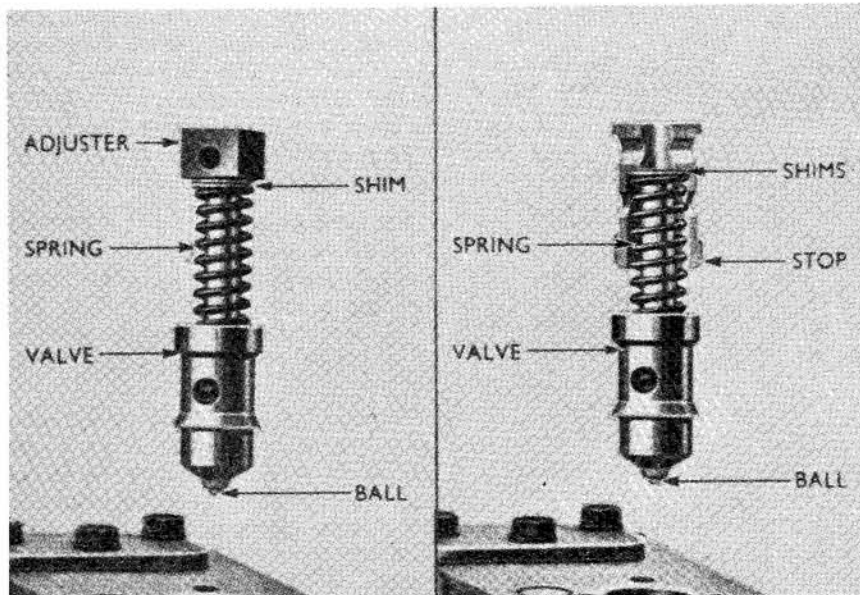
Views showing earlier type (Left) and latest type (Right) pressure relief valve assemblies.
